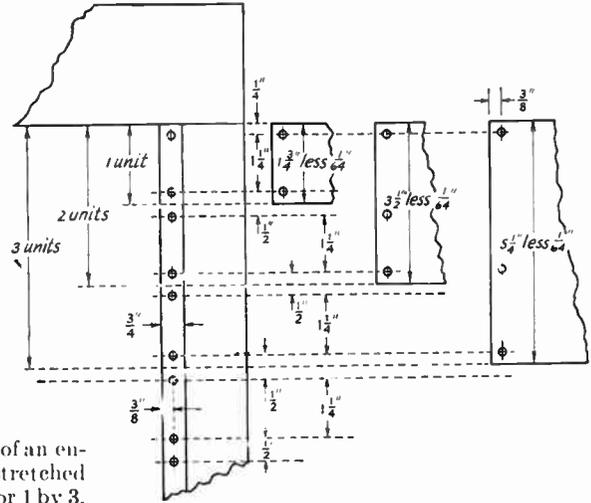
Detail sketch showing proper drilling for standard rack and panels. As shown for the 3 1/2- and 5 1/4-inch panels, only sufficient holes are drilled in the panel to provide the necessary strength. When the panels are drilled as shown, they may be moved up and down in steps of 1 3/4 inches and the holes will always match.
